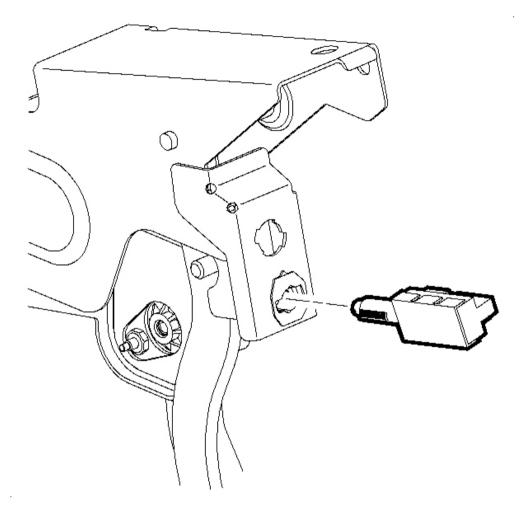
Removing/Installing Switch To The Bracket Courtesy of GENERAL MOTORS CORP.
